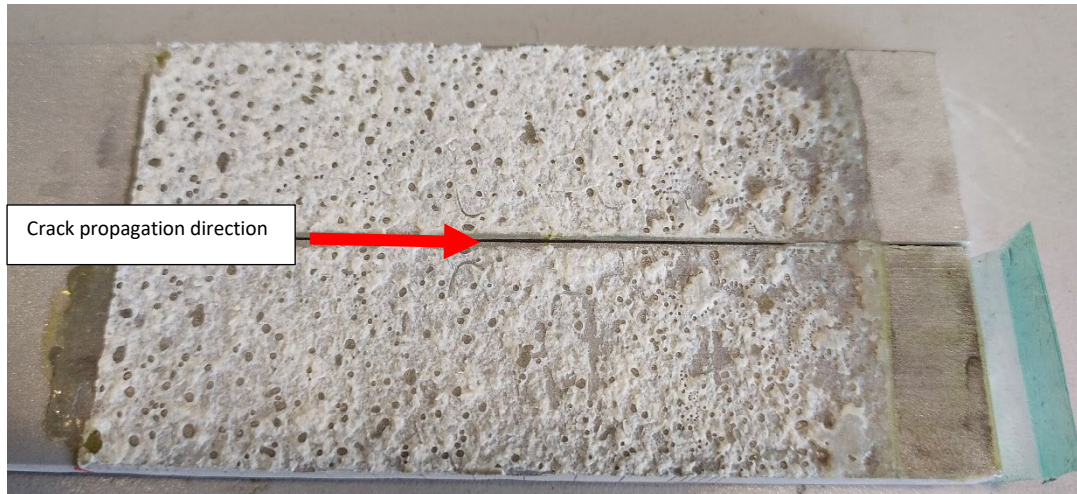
The cohesive fracture surface of specimen TDCB\_01
